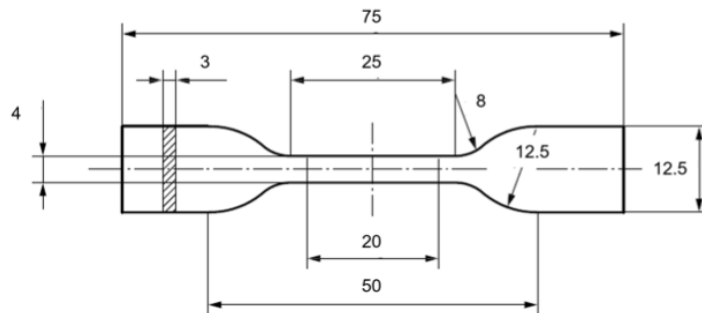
Geometry and dimensions of dumbbell specimens. Dimensions are in millimeters.
